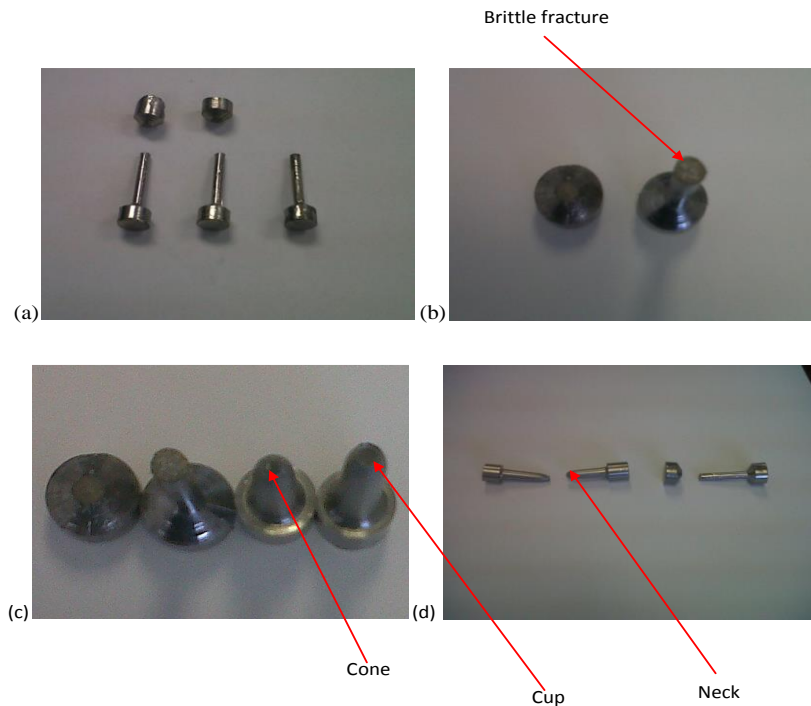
Photographs of tensile specimens after fracture (a) and (b) brittle fracture at the head-gauge interface in the as-cast condition, and (c) and (d) ductile fracture after heat treatment for 60mins at 900°C followed by water quenching (original length of the tensile specimens was 80mm).
